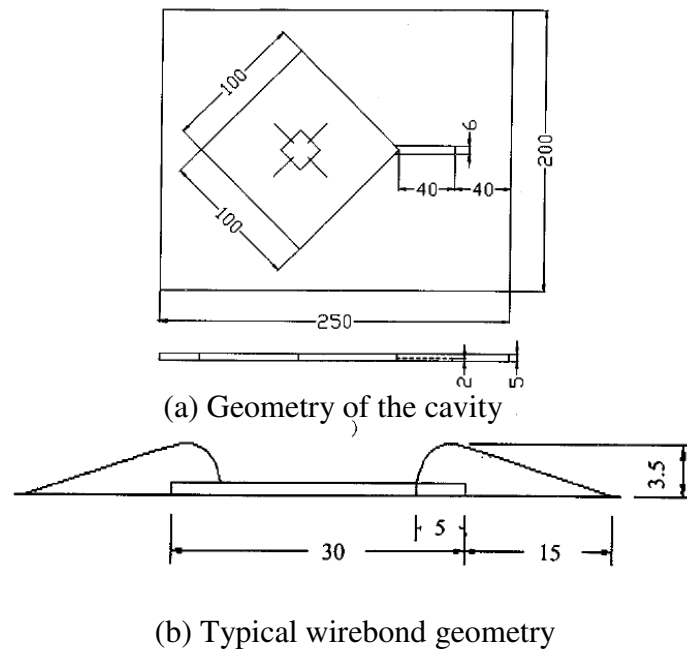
Sketch showing (a) geometry of the cavity and (b) typical wirebond geometry (Yang et al., 2000).
